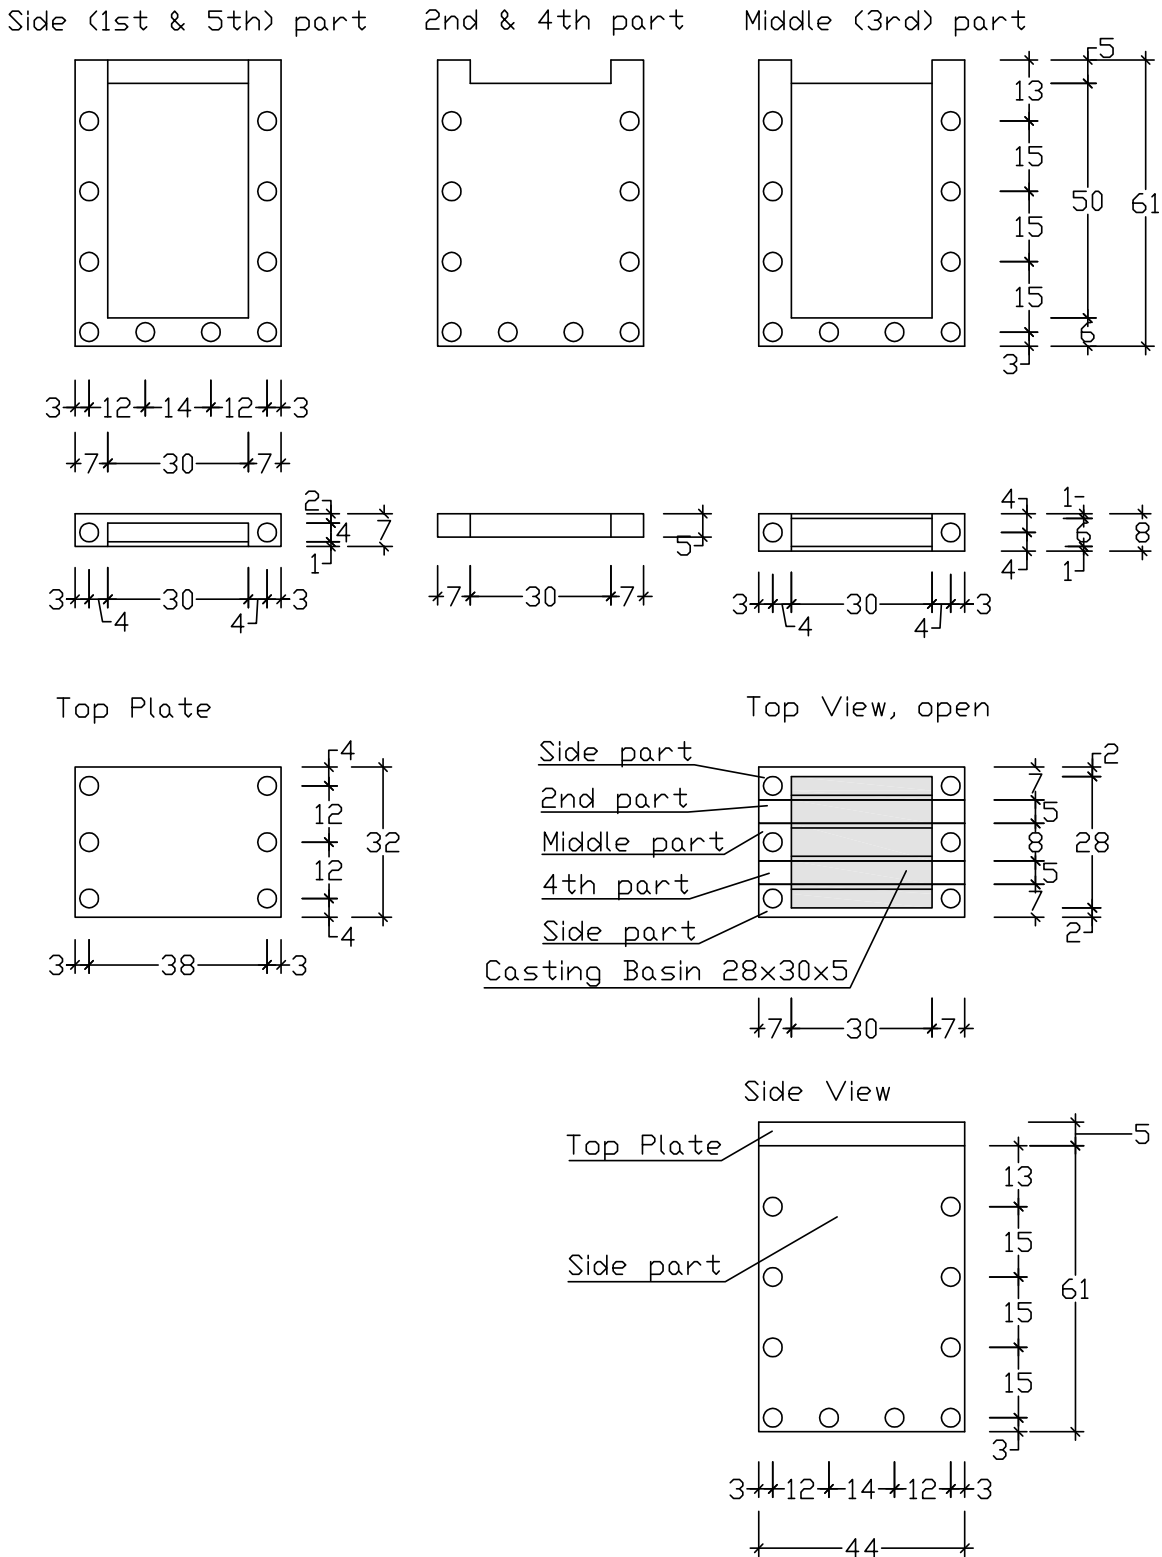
Technical drawing of the moulds used for preparing four pure shear samples ($b = 50\text{ mm}$, $w = 30\text{ mm}$, and $t = 1\text{ mm}$).
